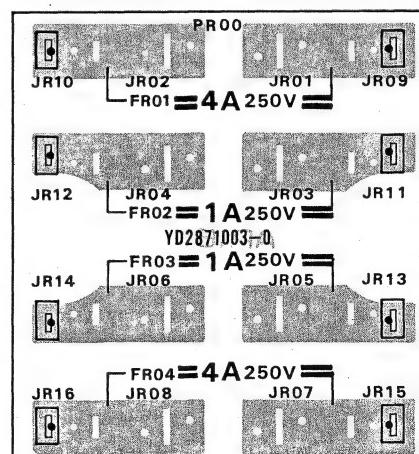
Fuse Board – PR01 Component Assembly Diagram
